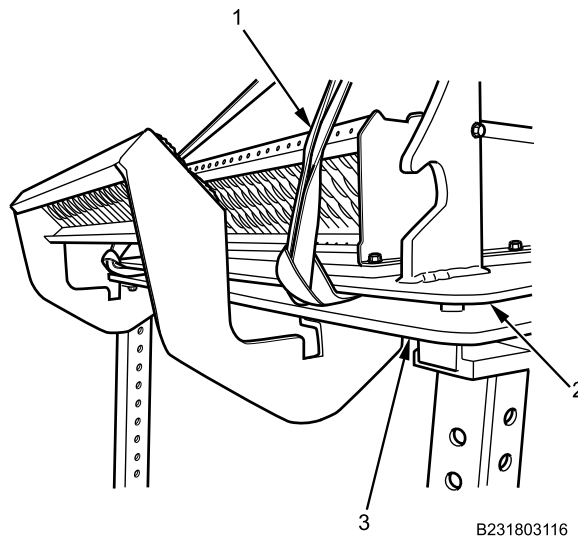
Loop Lifting Sling Around Door/Ramp Right Rear Mounting Boss.
